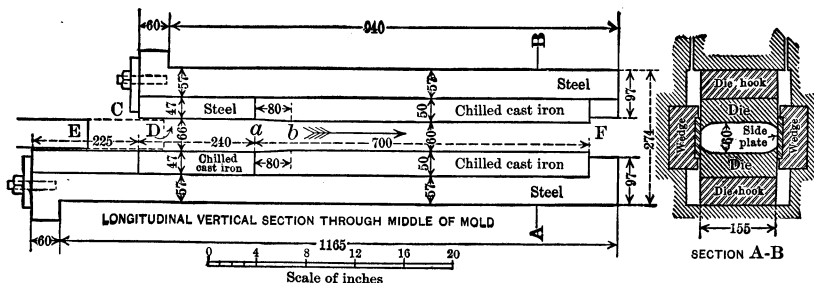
Vertical sections through mold box of lignite-briquetting press; dimensions are in millimeters.
